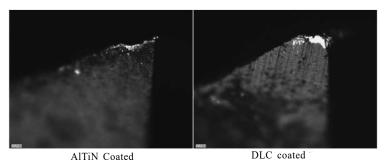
AlTiN and DLC coated cutting tools edge after machining at 500X.
